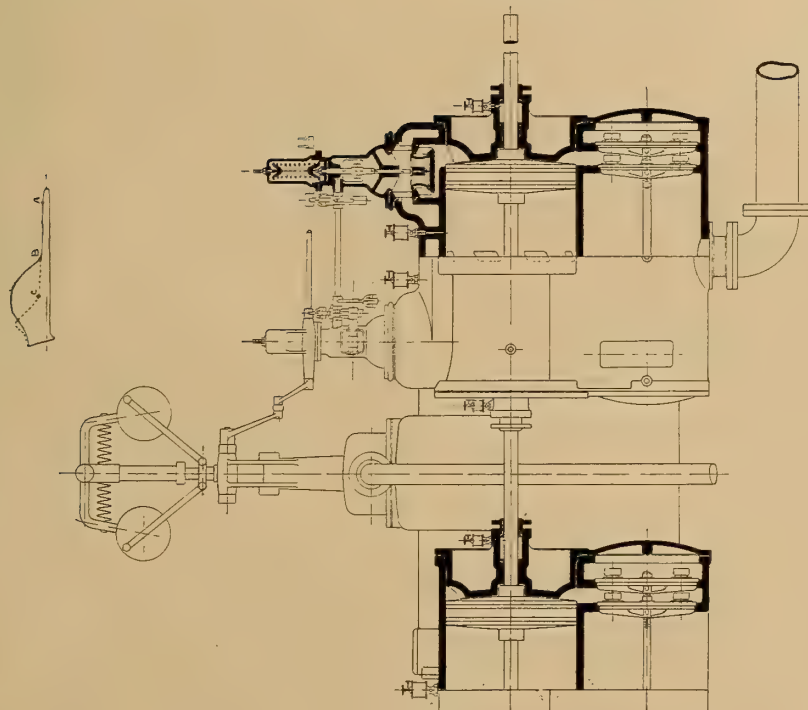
LONGITUDINAL VIEW OF GAS PUMP AND GOVERNOR ON KOERTING ENGINE. DE LA VERGNE MACHINE CO., NEW YORK
